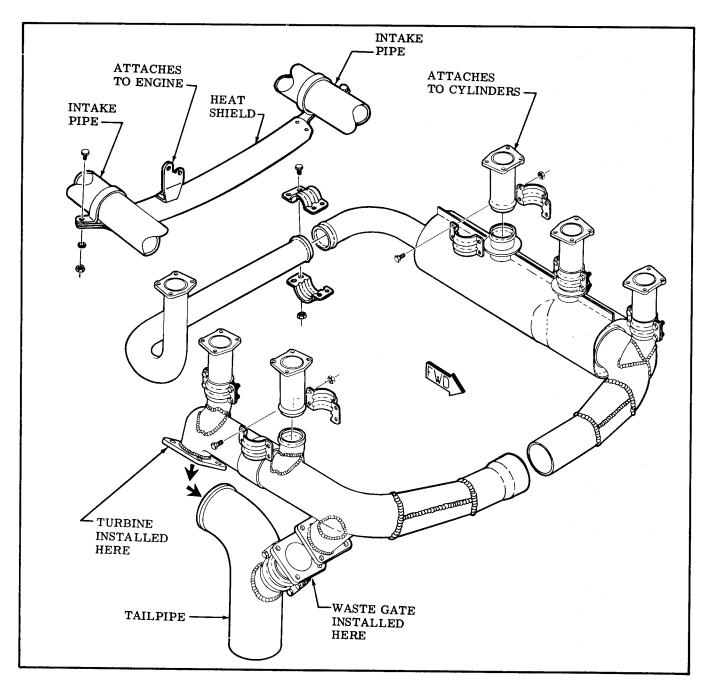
A-5. Exhaust System (Sheet 1 of 2)
